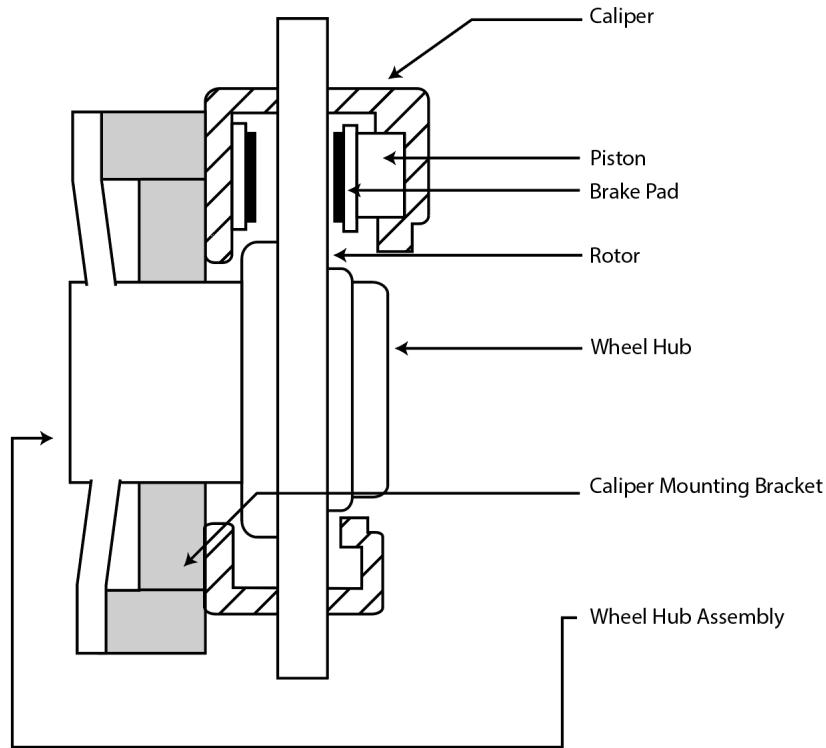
Side view of a brake rotor and a floating caliper [13]
